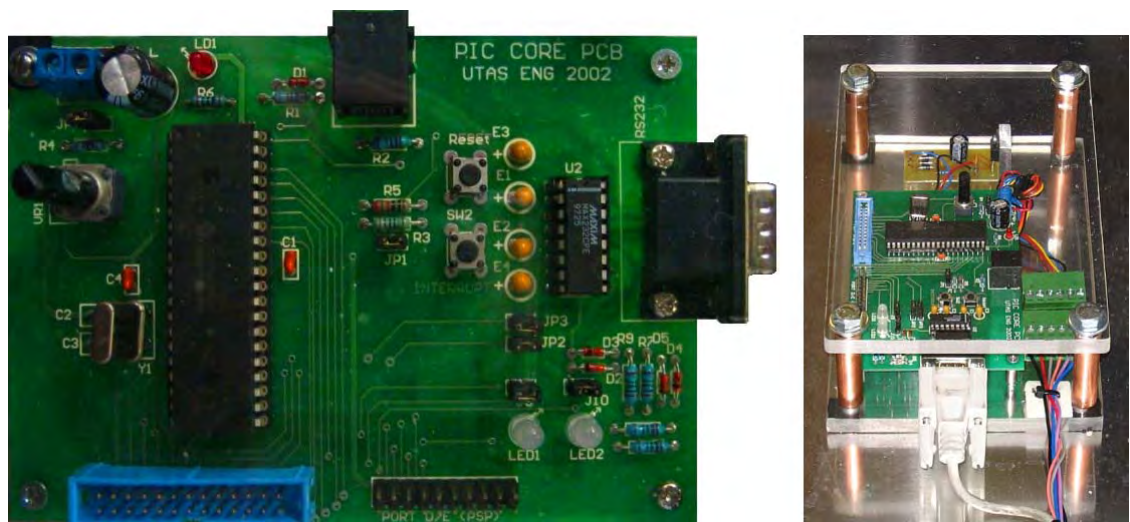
Custom PIC core PCB for wheel speed measurement
